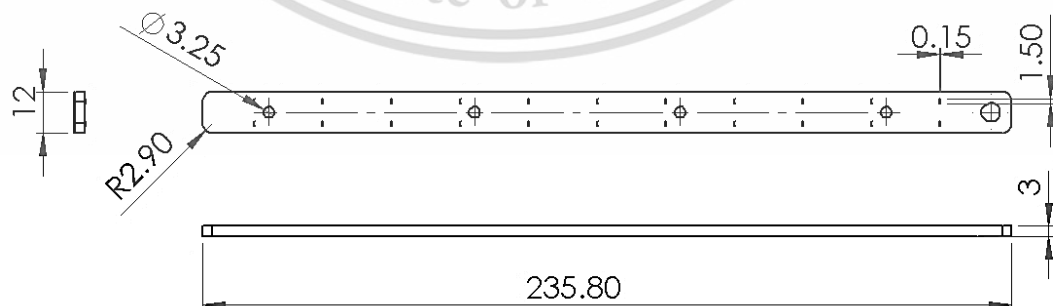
Sample of Positive Busbar drawing by CAD model
